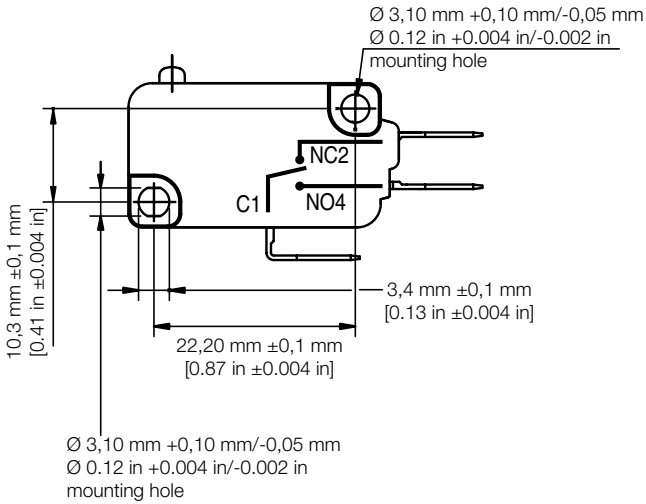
V15 Series USA Mounting Hole Dimensions for #4 screws
